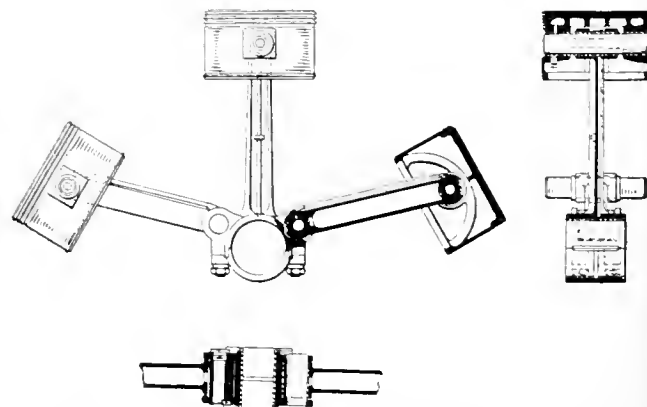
NAPIER LION AIRCRAFT ENGINE ASSEMBLY OF CONNECTING RODS AND PISTONS
